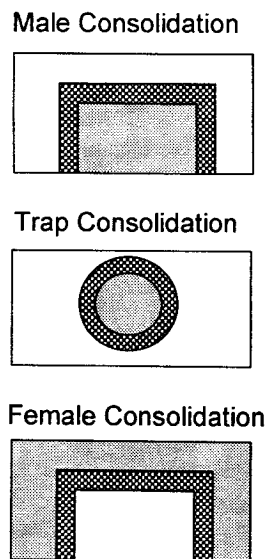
Rubber tool configurations : rubber tool, prepreg, mold.
